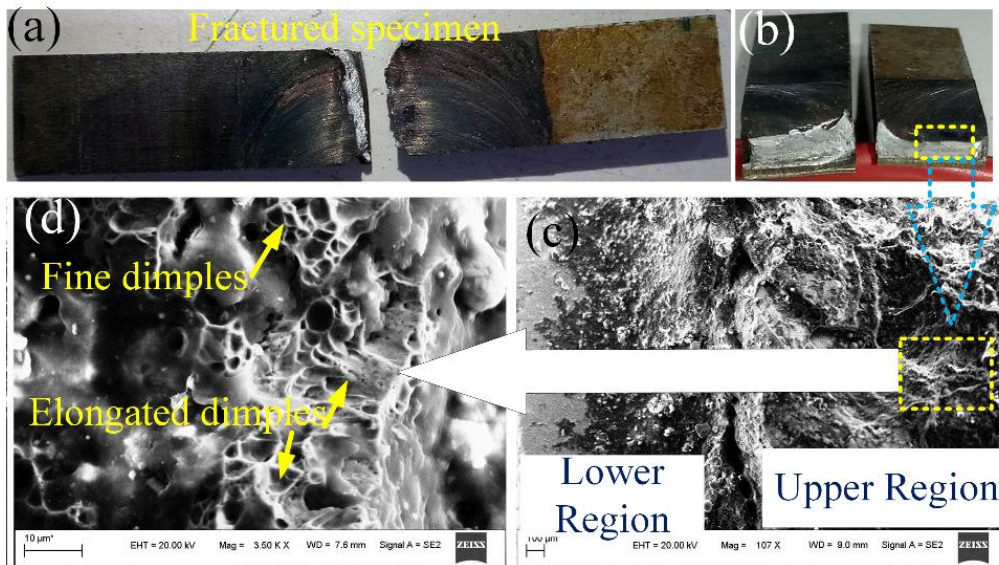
Impact specimen of weld 4: (a) fractured impact specimen, (b) macro fracture surface appearance, (c) micrograph showing lower and upper fracture surface region, and (d) typical ductile dimples observed in the upper region indicated a mixed fracture mode
